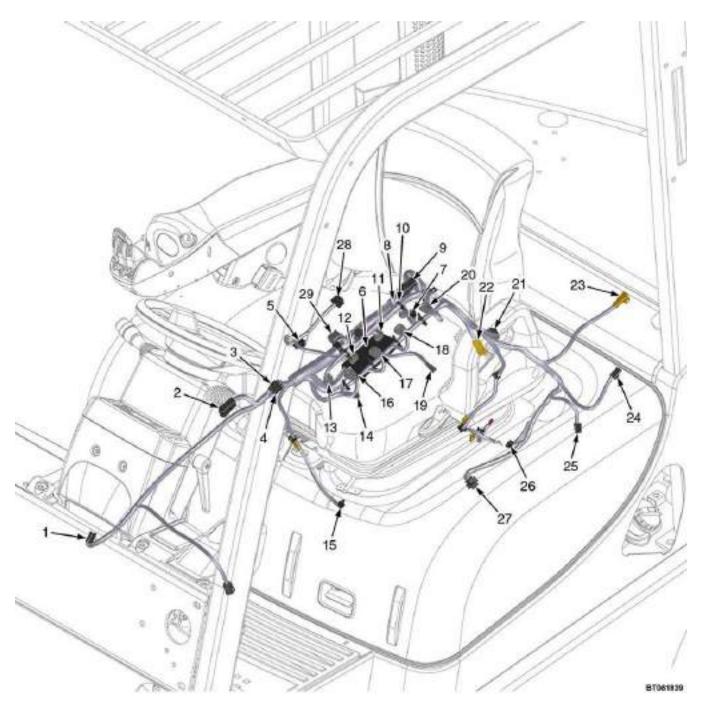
Engine Harness Assembly (PSI 2.4L Bi-Fuel)
